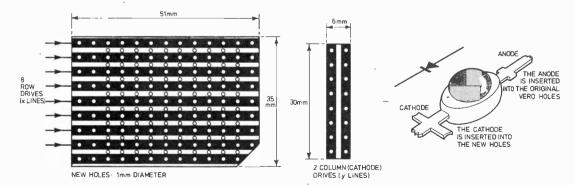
Board assembly details for Display Matrix. The adjacent photograph shows final assembly of the Y line Veroboard strips, the fifth strip not yet being soldered
